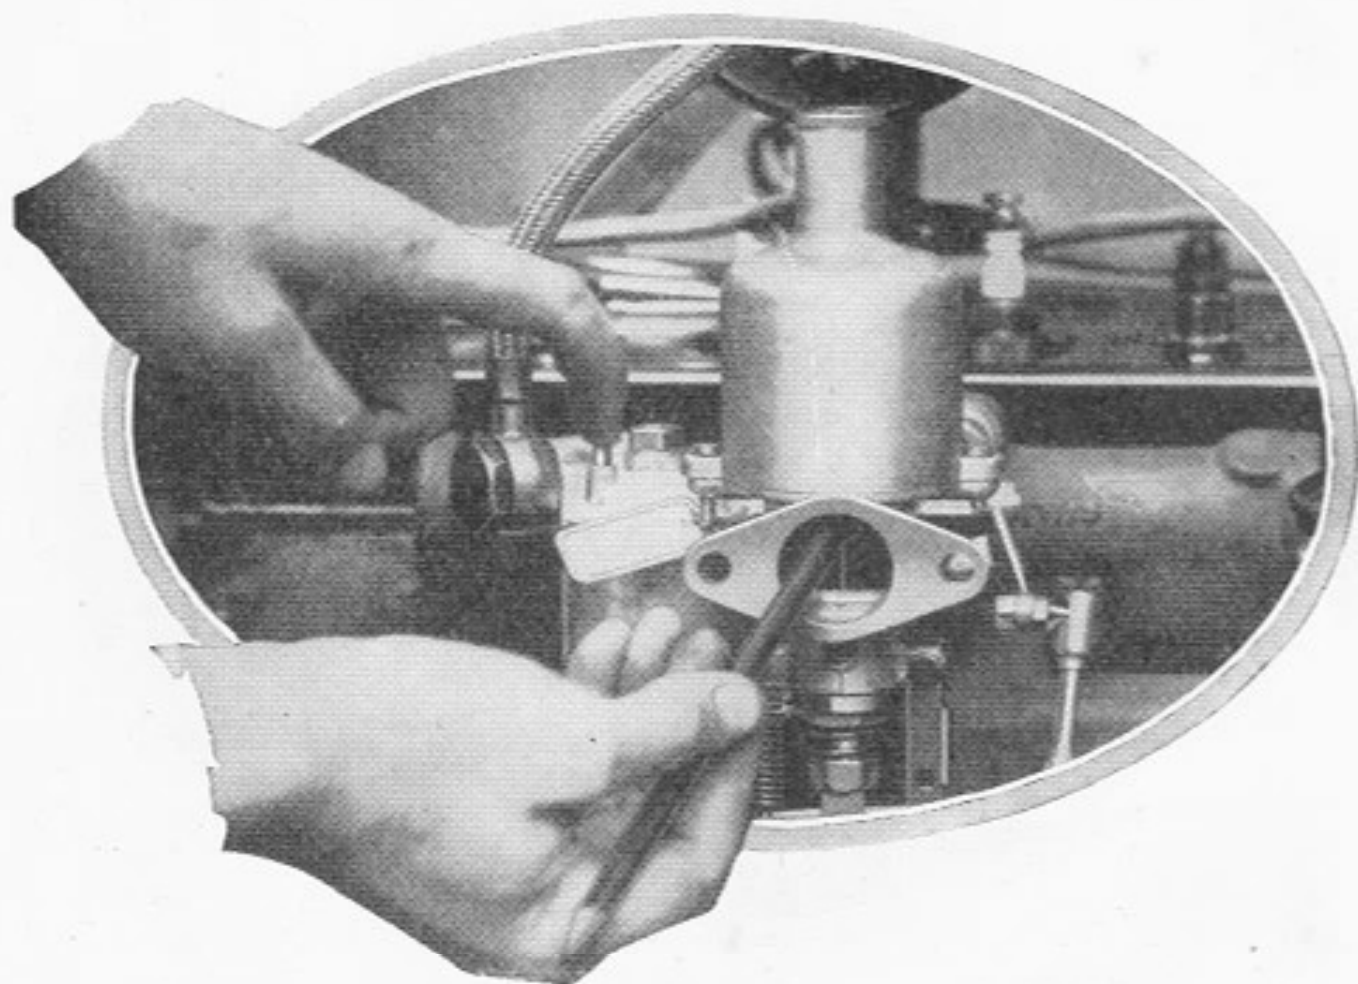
RAISING THE PISTON TO EXPOSE THE JET
